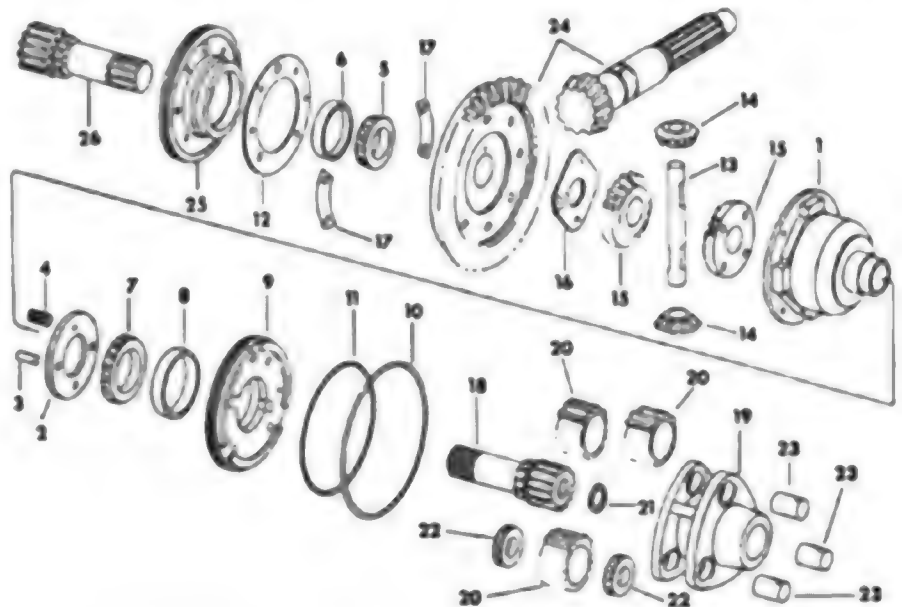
Exploded view of differential, planetary unit and associated parts used on Model Hydro 84 tractors.
